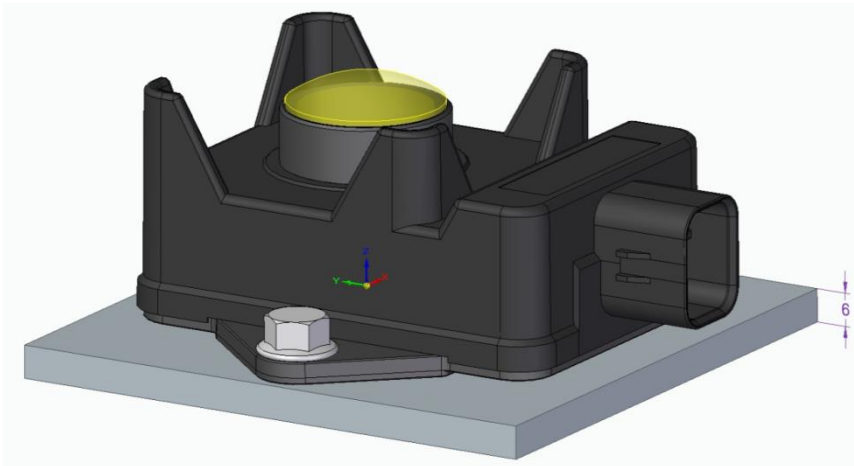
Mounting on a thick soft steel plate ($\geq 6\text{mm}$).
